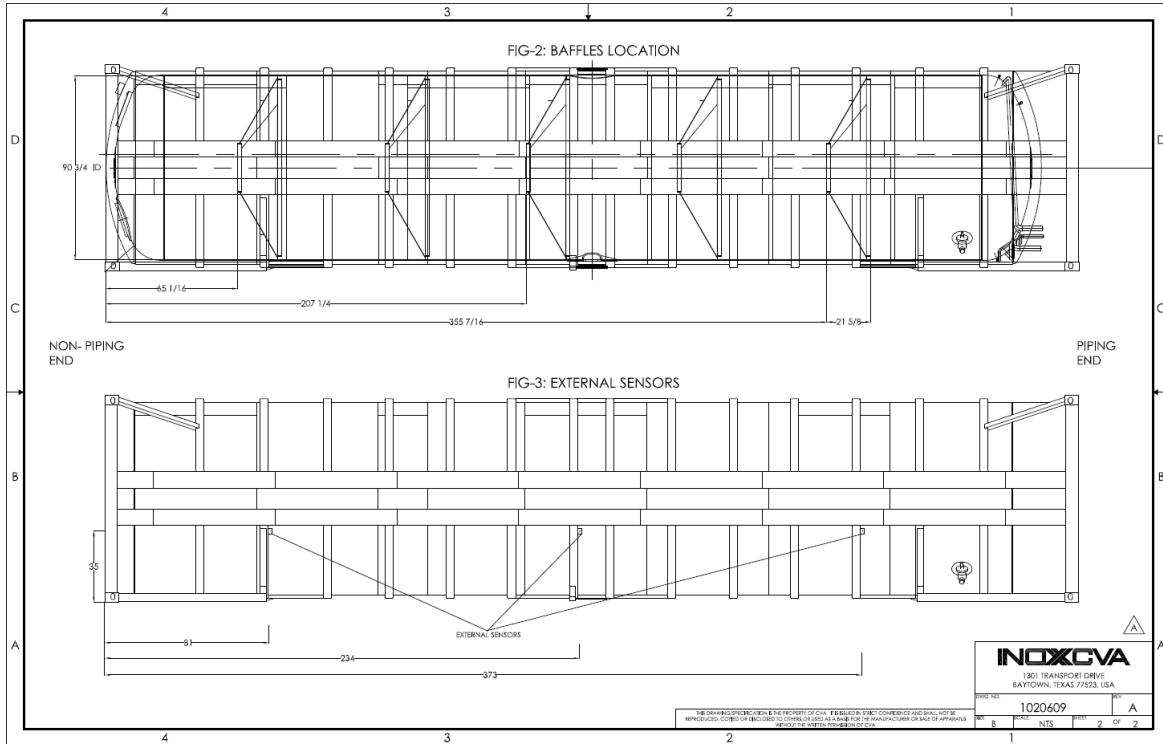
ISO Tank Showing Location of Baffles in Plain View and External Weld-Pad Thermocouples in Elevation View (provided by CVA)
